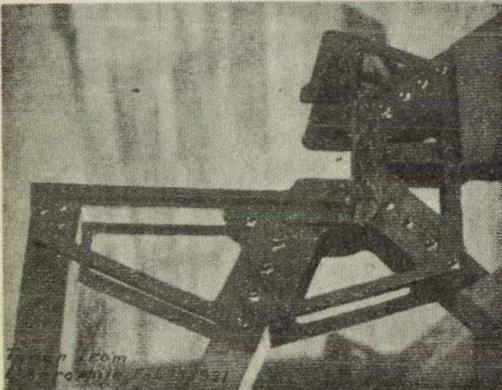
Fitting of fuselage and rear longeron, (assembled). Note the tubular rivets.
